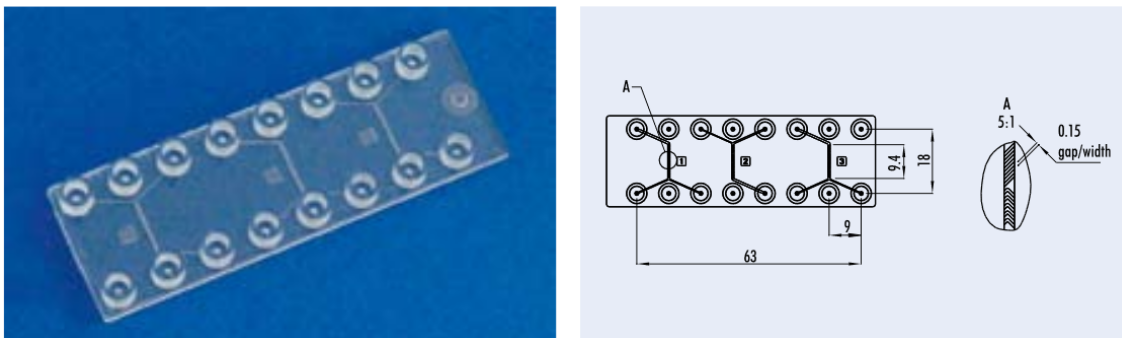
Herringbone design drawings. The specific herringbone mixer used in this experiment is presented to the left. On the right side the industrial drawing of the company is shown with the dimensions and grooves [62].
